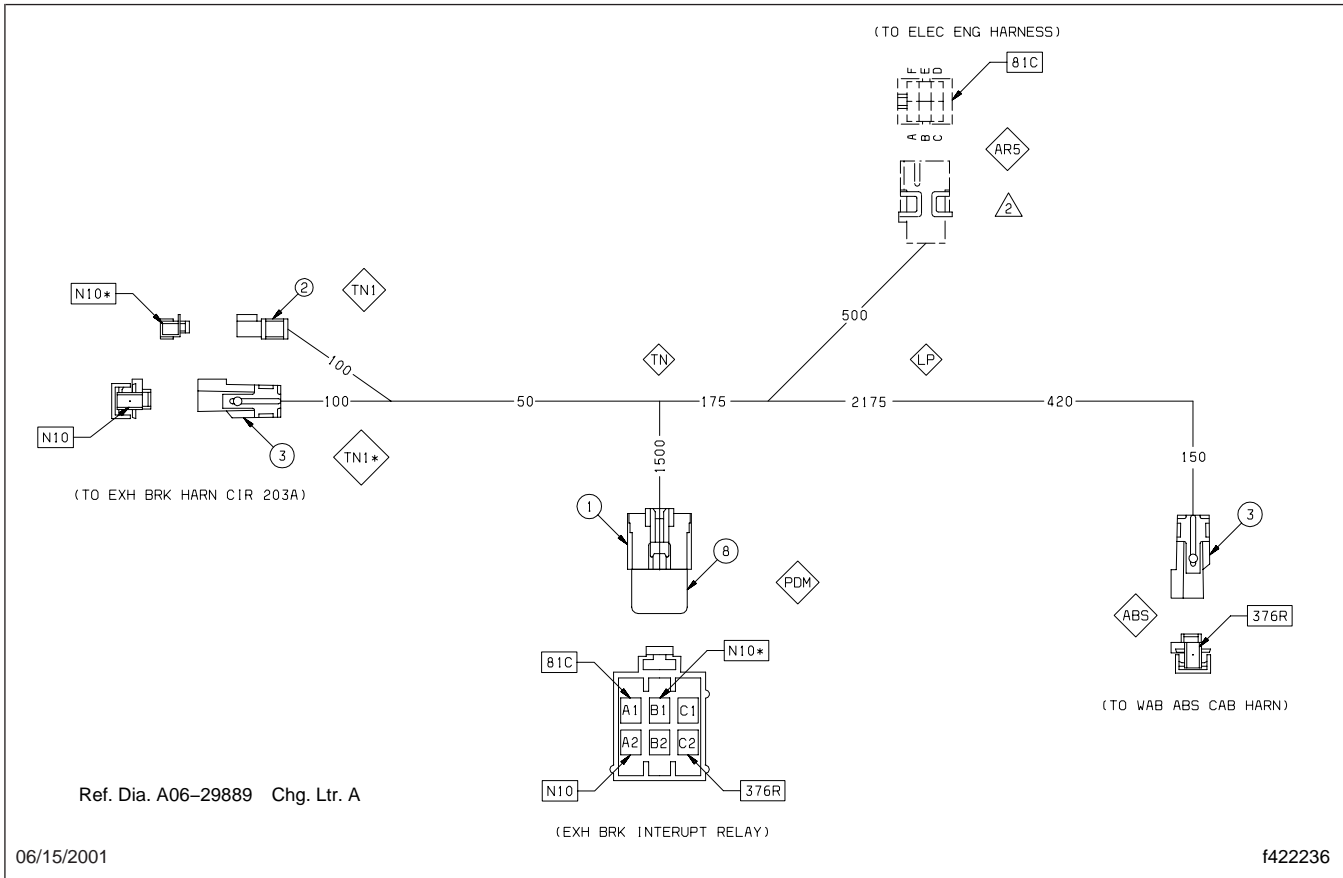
, Exhaust Brake Interrupt Relay Wiring
